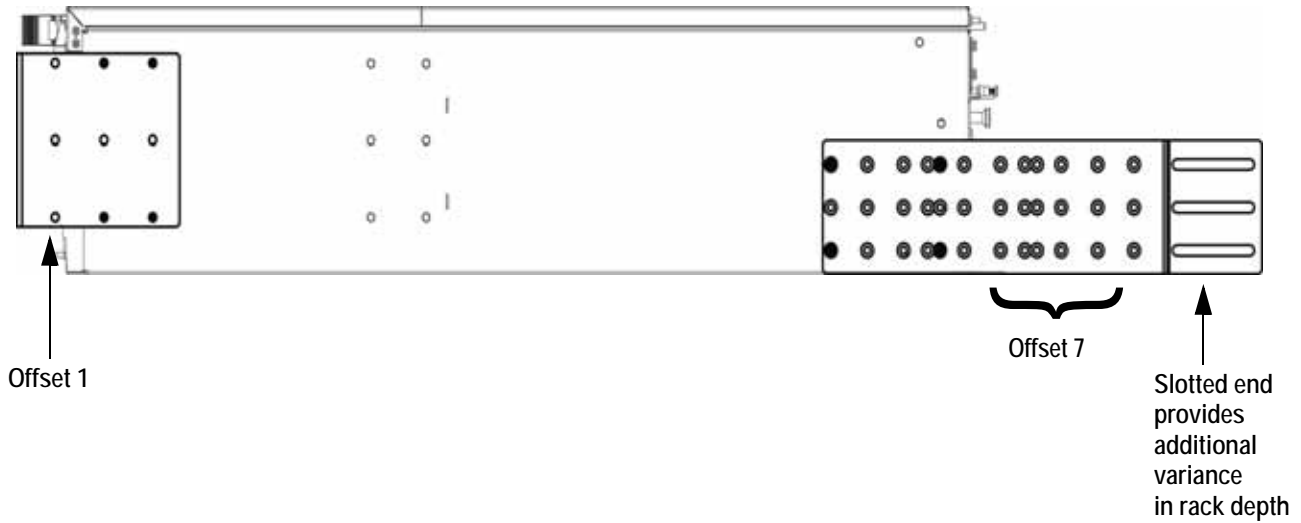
Bracket Mounting for 36" to 37.5" Rack
